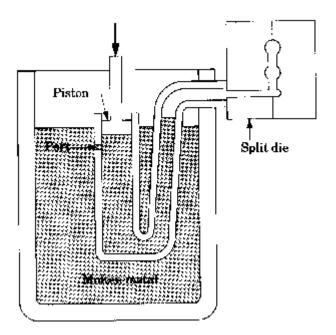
Plunger type hot-chamber die-casting Machine
